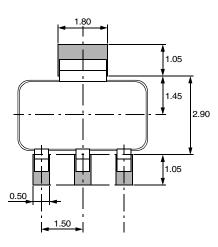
Recommended footprint SOT89B-3, Dimensions in mm All dimensions are for reference only. The pad size may vary depending on the requirements of the soldering process.
